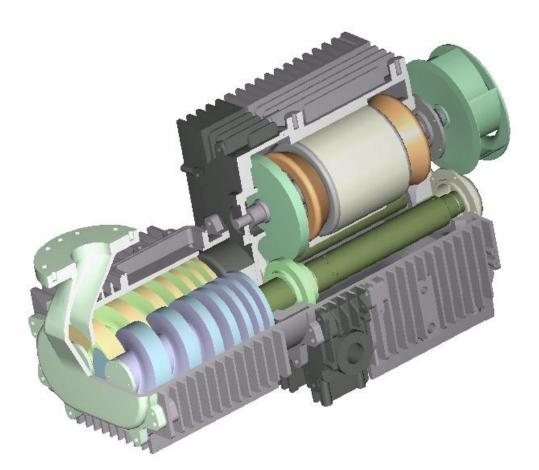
Internal structure of a screw pump with cantilevered rotors, built-in motor and air cooling. The rotor shafts run at twice the speed of the motor shaft due to the gearing. The motor shaft holds at its two ends the oil pump (front) and the fan (rear).
